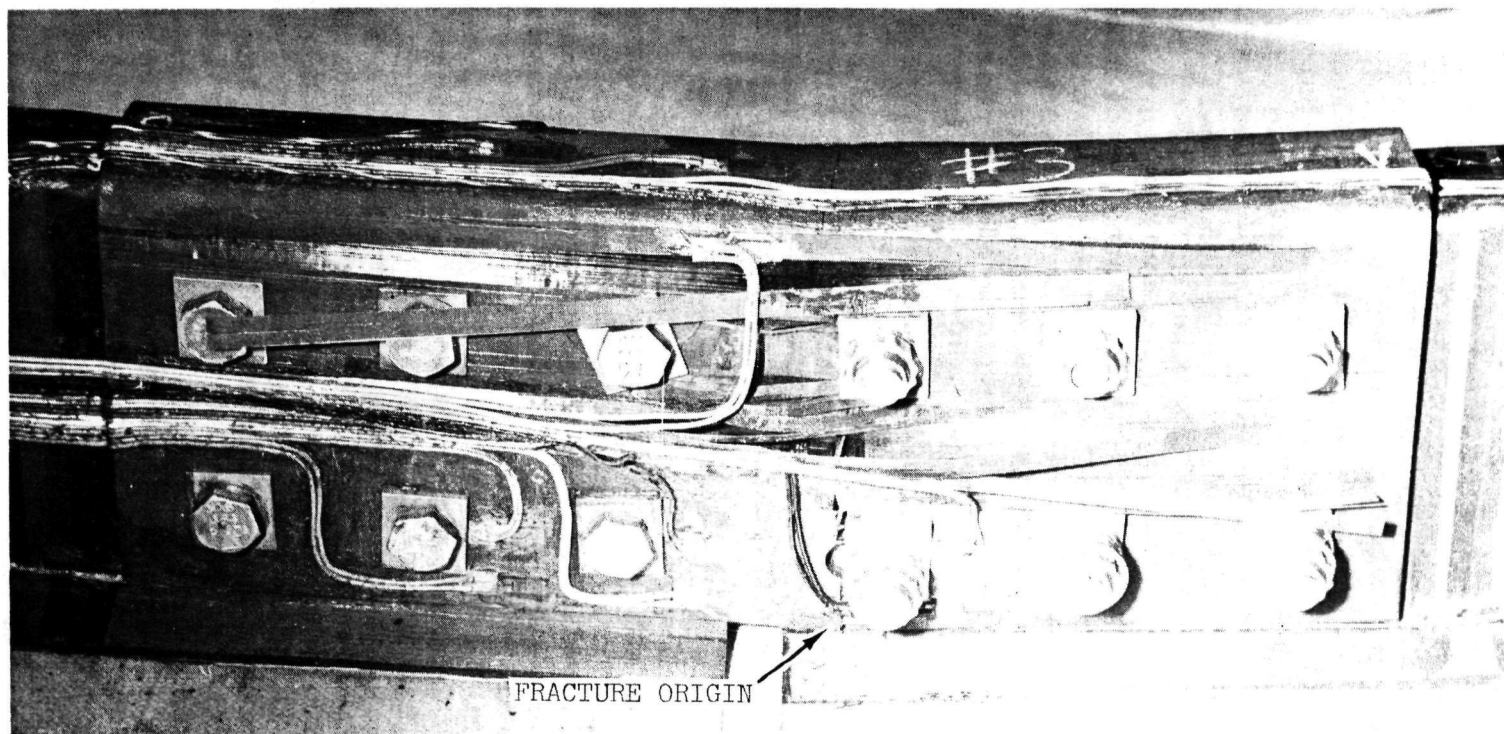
#3 FRAME SPLICE JOINT FATIGUE SPECIMEN, STATIC FRACTURE OF SPLICE CHANNEL INITIATED AT FREE EDGE BELOW BOLT HOLE CLOSEST TO SPECIMEN CENTER LINE.
